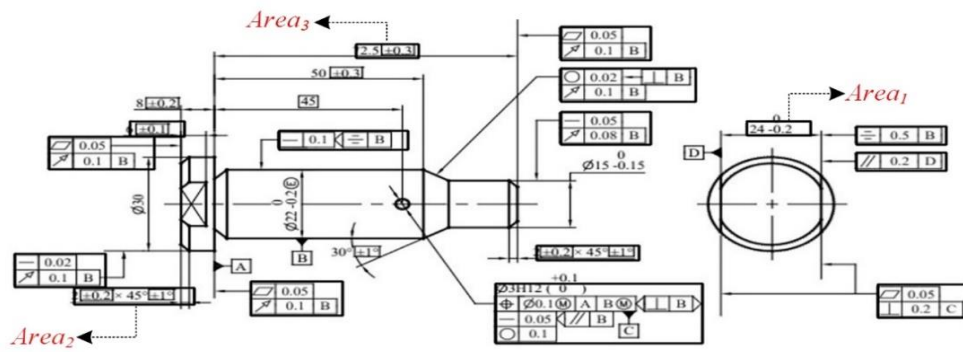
The outlined black boxes for suspected tolerancing callout blocks on the technical drawing in pre-processing stage.
